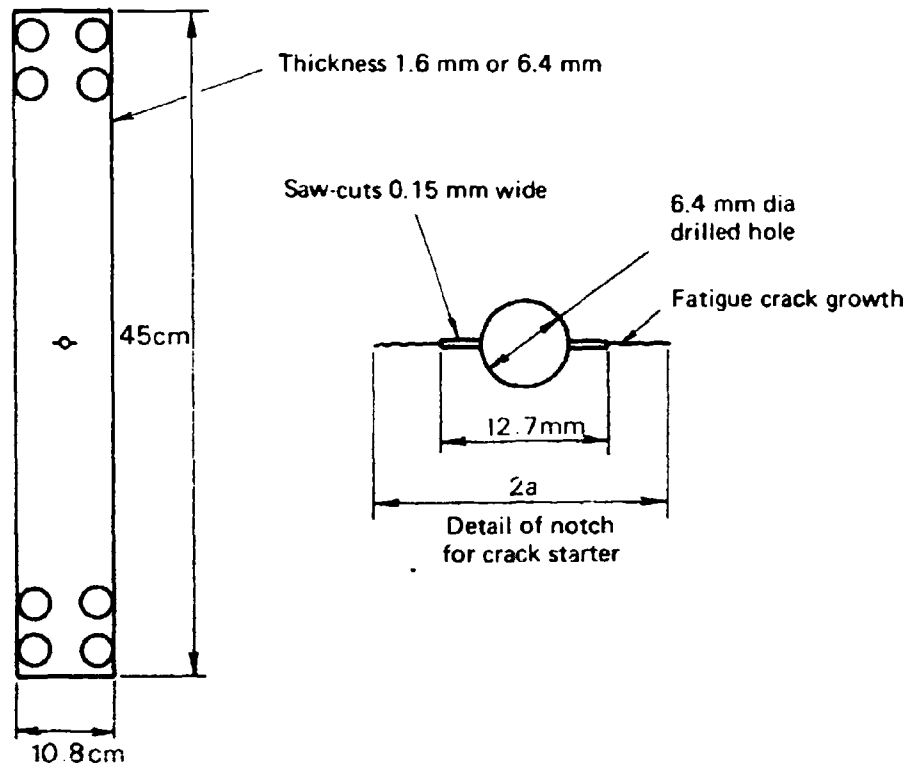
DIMENSIONS OF 2024-T3 ALUMINIUM ALLOY SPECIMENS.
